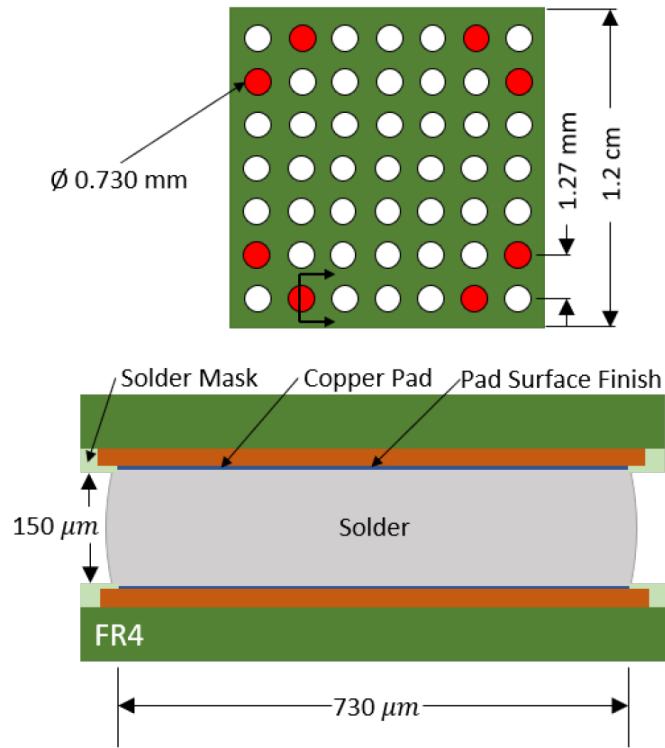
Schematic illustration of Sn-58Bi and Sn-57Bi-1Ag solder test specimens. The eight red circles indicate the locations of the solder joints in the top view of the printed circuit board (top). The cross section of an assembled single solder joint (bottom)
